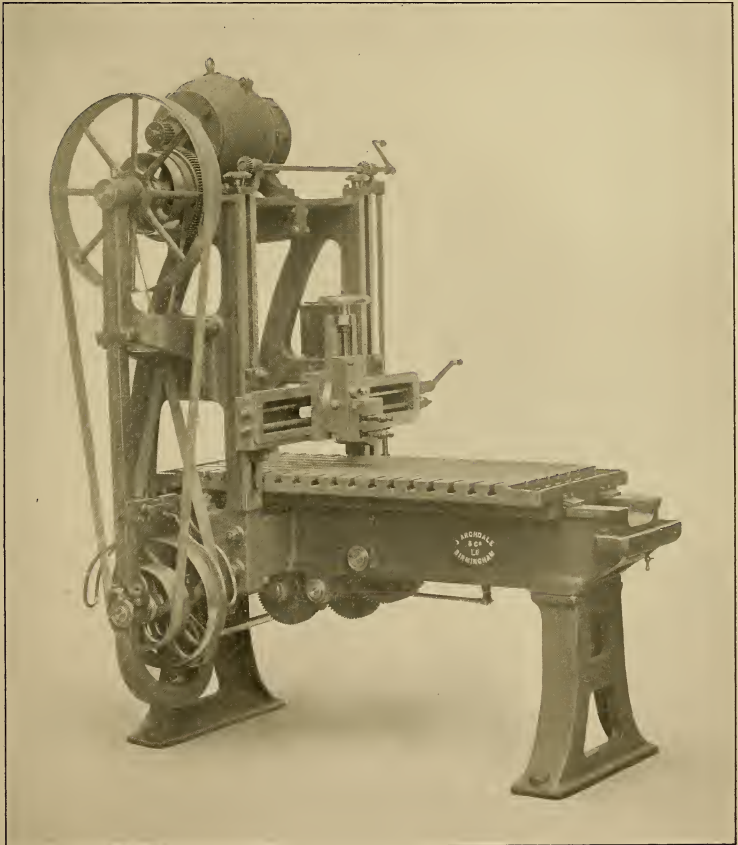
AN ELECTRICALLY DRIVEN PLANING MACHINE. MADE BY MESSRS. J. ARCHDALE & CO., LTD., BIRMINGHAM, ENGLAND
